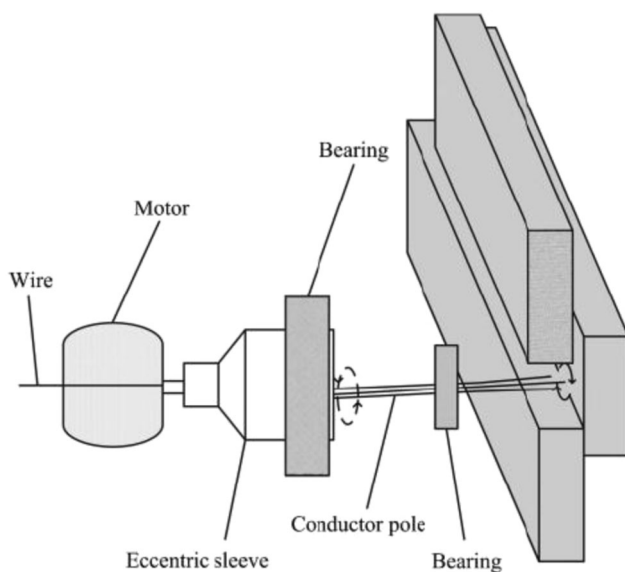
Schematic of rotating arc welding setup [12]
